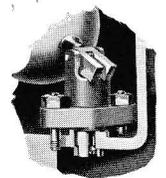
Valve Assembly of Webster Drip Trap, Size 026.
